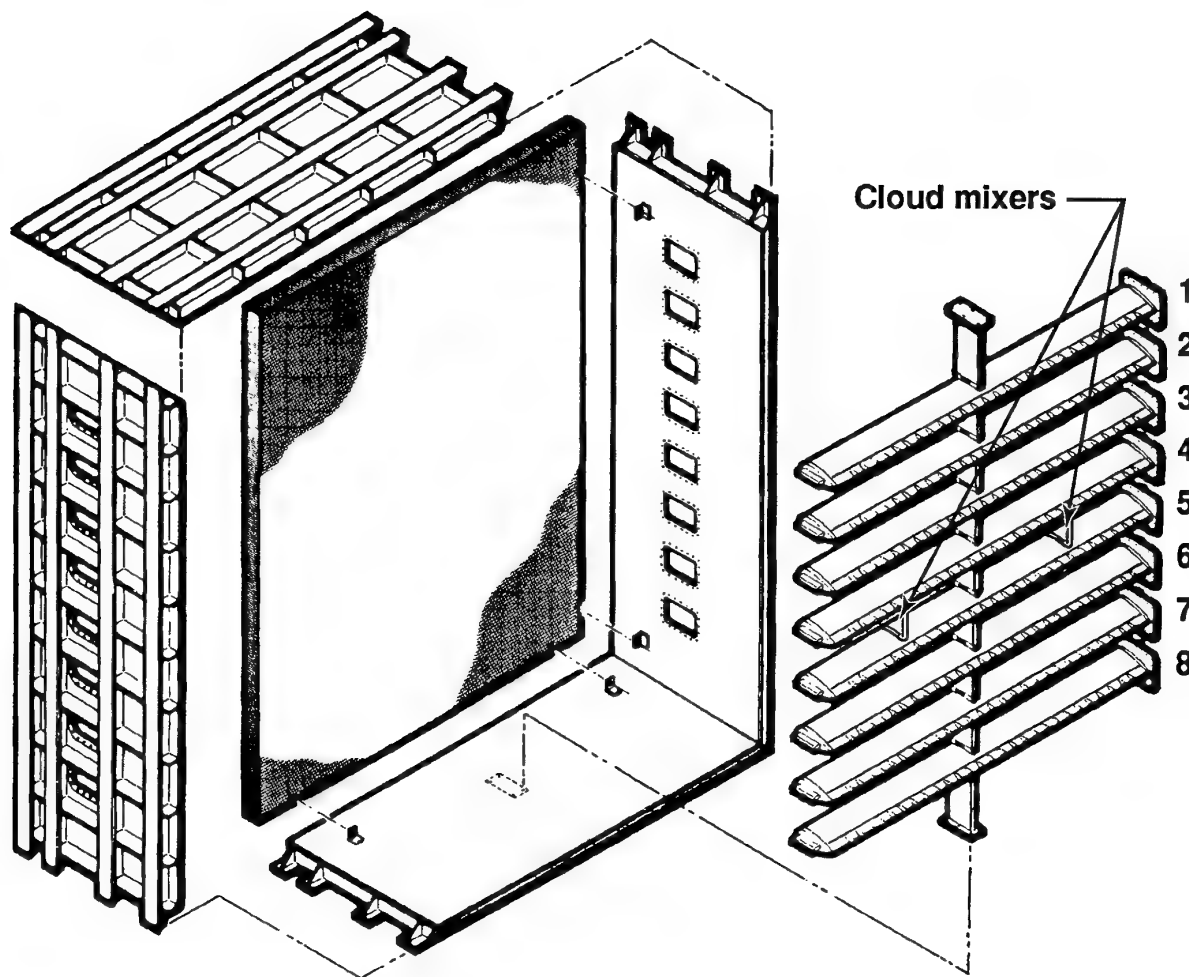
Spraybar/Honeycomb Tunnel Section (Exploded View).
